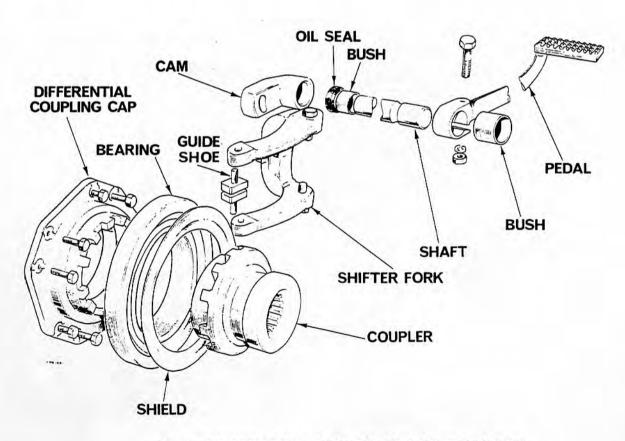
EXPLODED VIEW OF DIFFERENTIAL LOCK COMPONENTS
